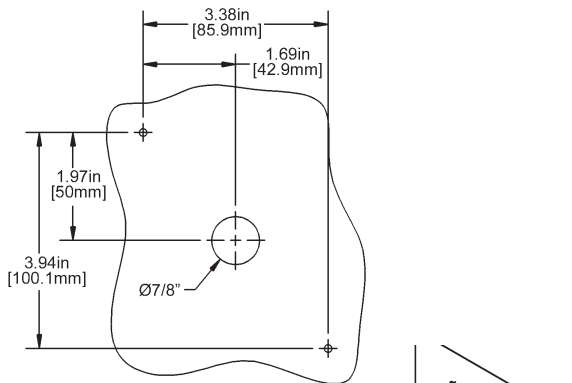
Weatherproof (WP) Enclosure Mounting Holes
